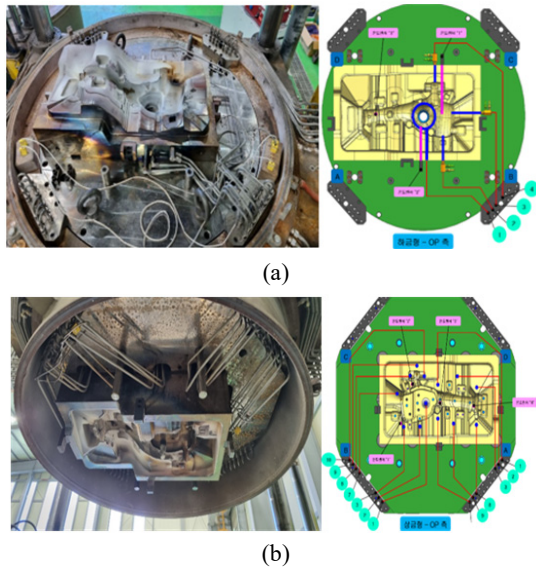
Lower mold (a) and upper mold (b) used in the experiment
